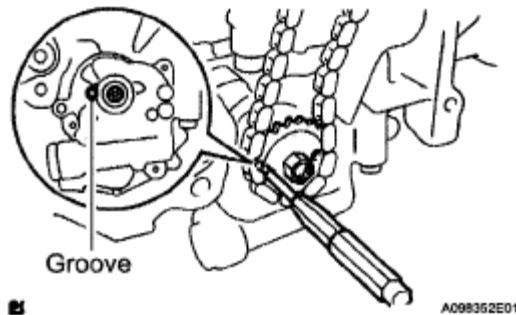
Adjusting Hole Of Oil Pump Drive Shaft Gear To Lock Gear
